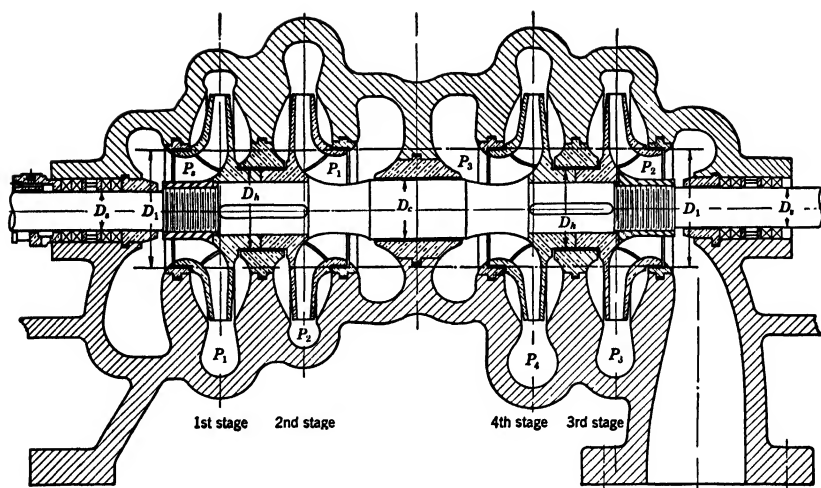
Four-stage pump. Axial thrust due to shaft shoulders and impeller hubs.
